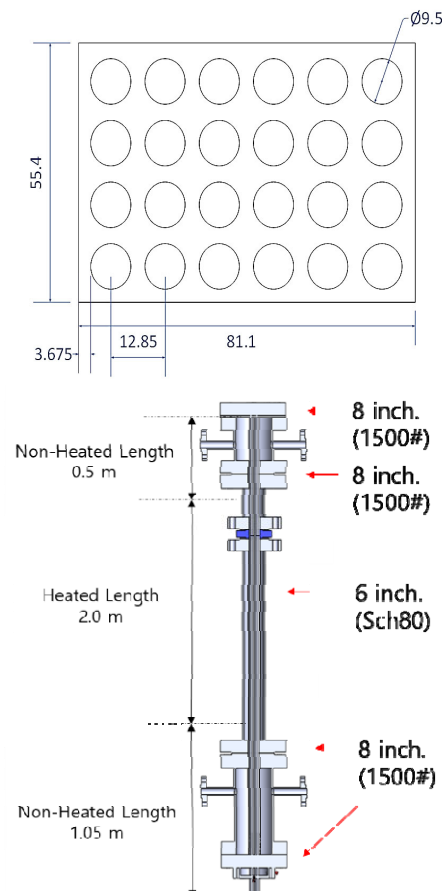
Schematic diagram of the test section (top) and test facility (bottom)
